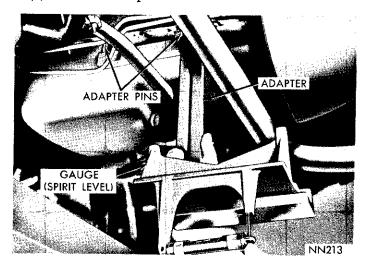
Adjusting Gauge on Engine (Front Joint Angle Reference)
